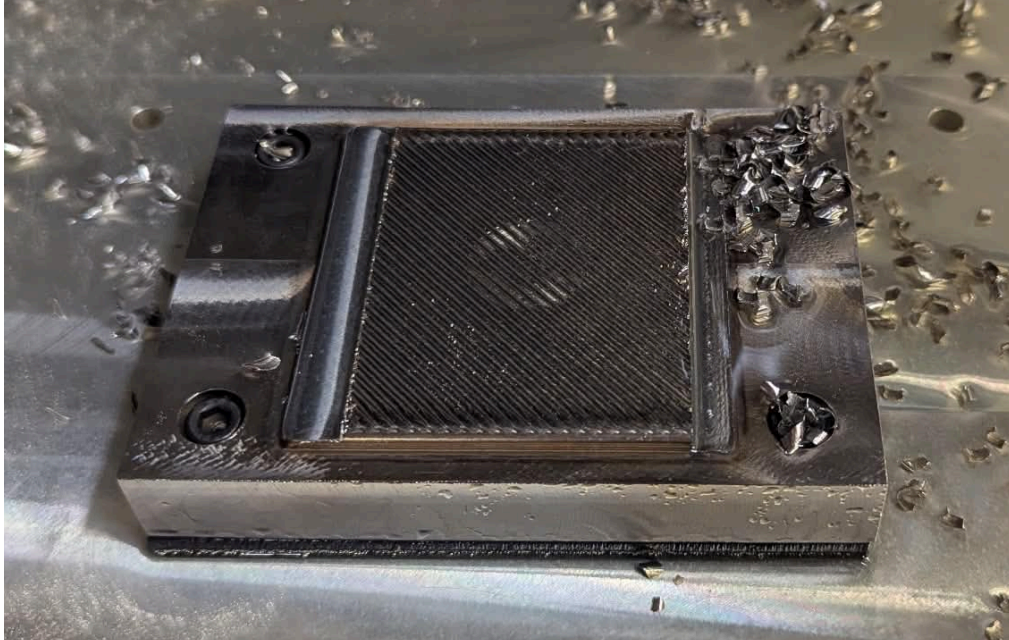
Alumina Silicate design with facemilling (left) and side milling (right)
